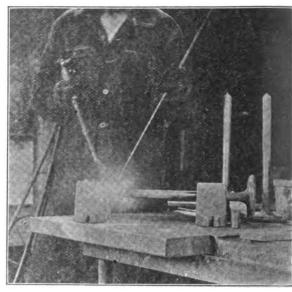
The V Block Arrangement and the Welding Operation.
